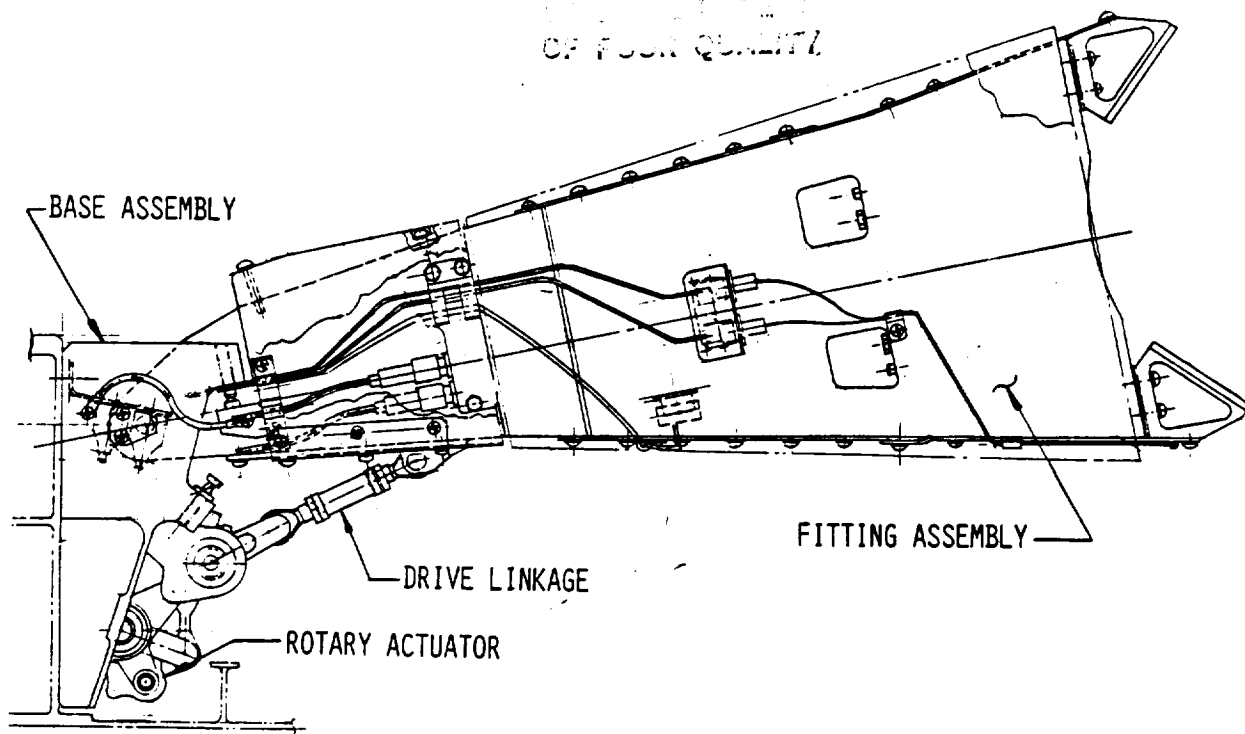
Manipulator Positioning Mechanism Pedestal Assembly
